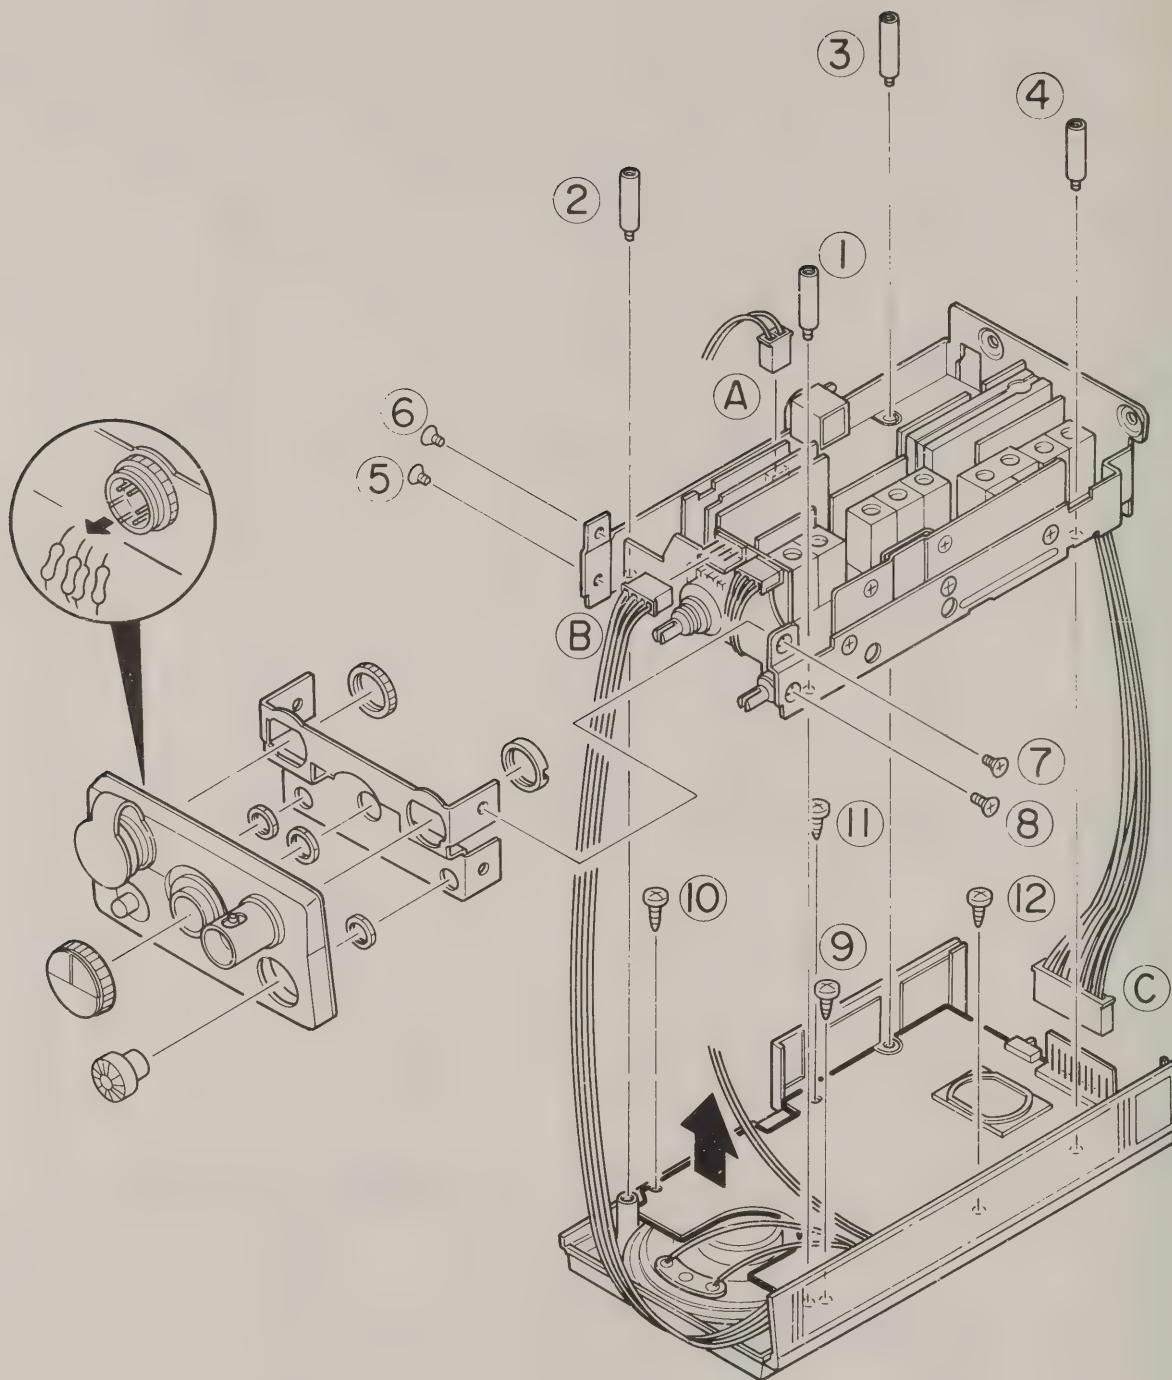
HX200SII CHASSIS ASSEMBLY
